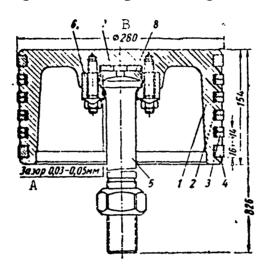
Piston of the first stage: 1) piston; 2) expander ring; 3) piston ring; 4) guide ring; 5) piston rod; 6) cap; 7) washer; 8) pin. A) Space 0.03-0.05 mm; B) diameter.
